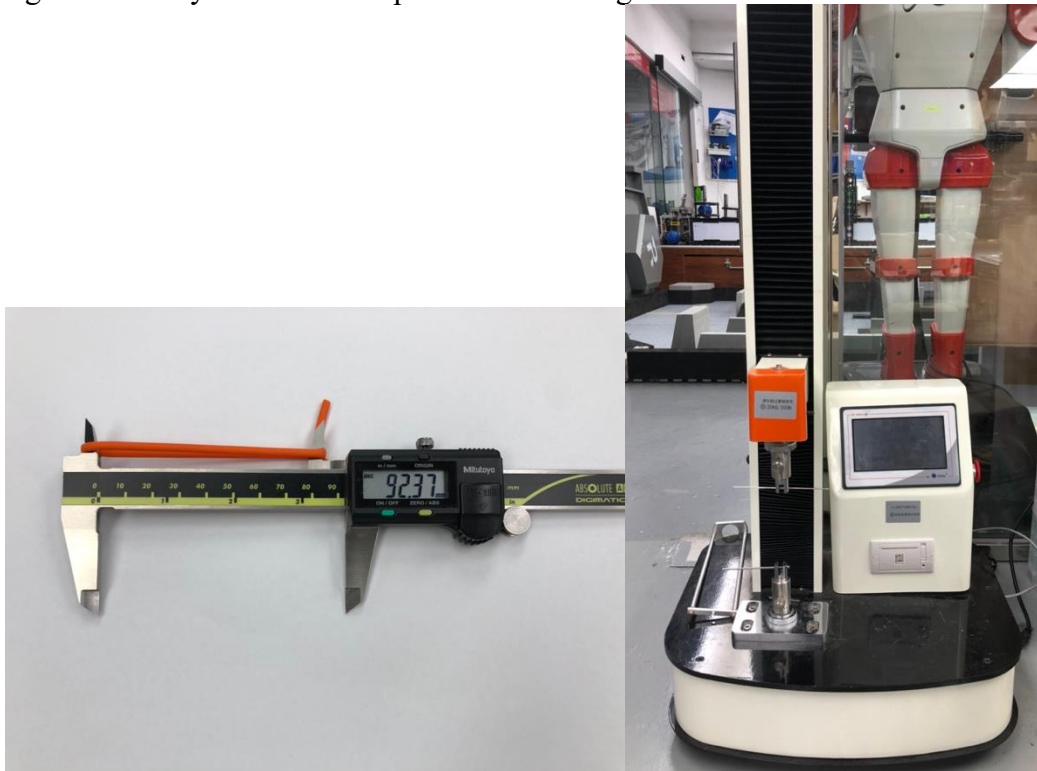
A Caliper (left) and a Tensile Testing Machine (Right)
